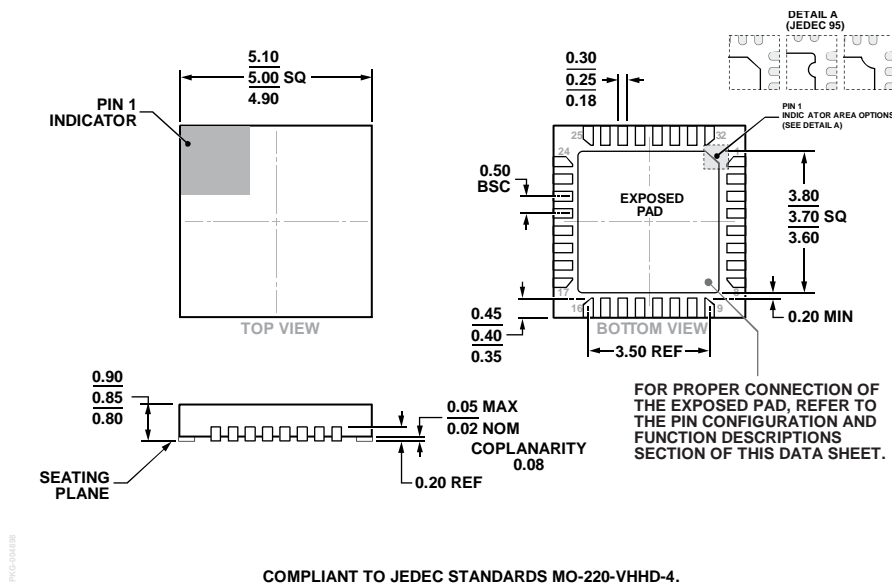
32-Lead Lead Frame Chip Scale Package [LFCSP]
